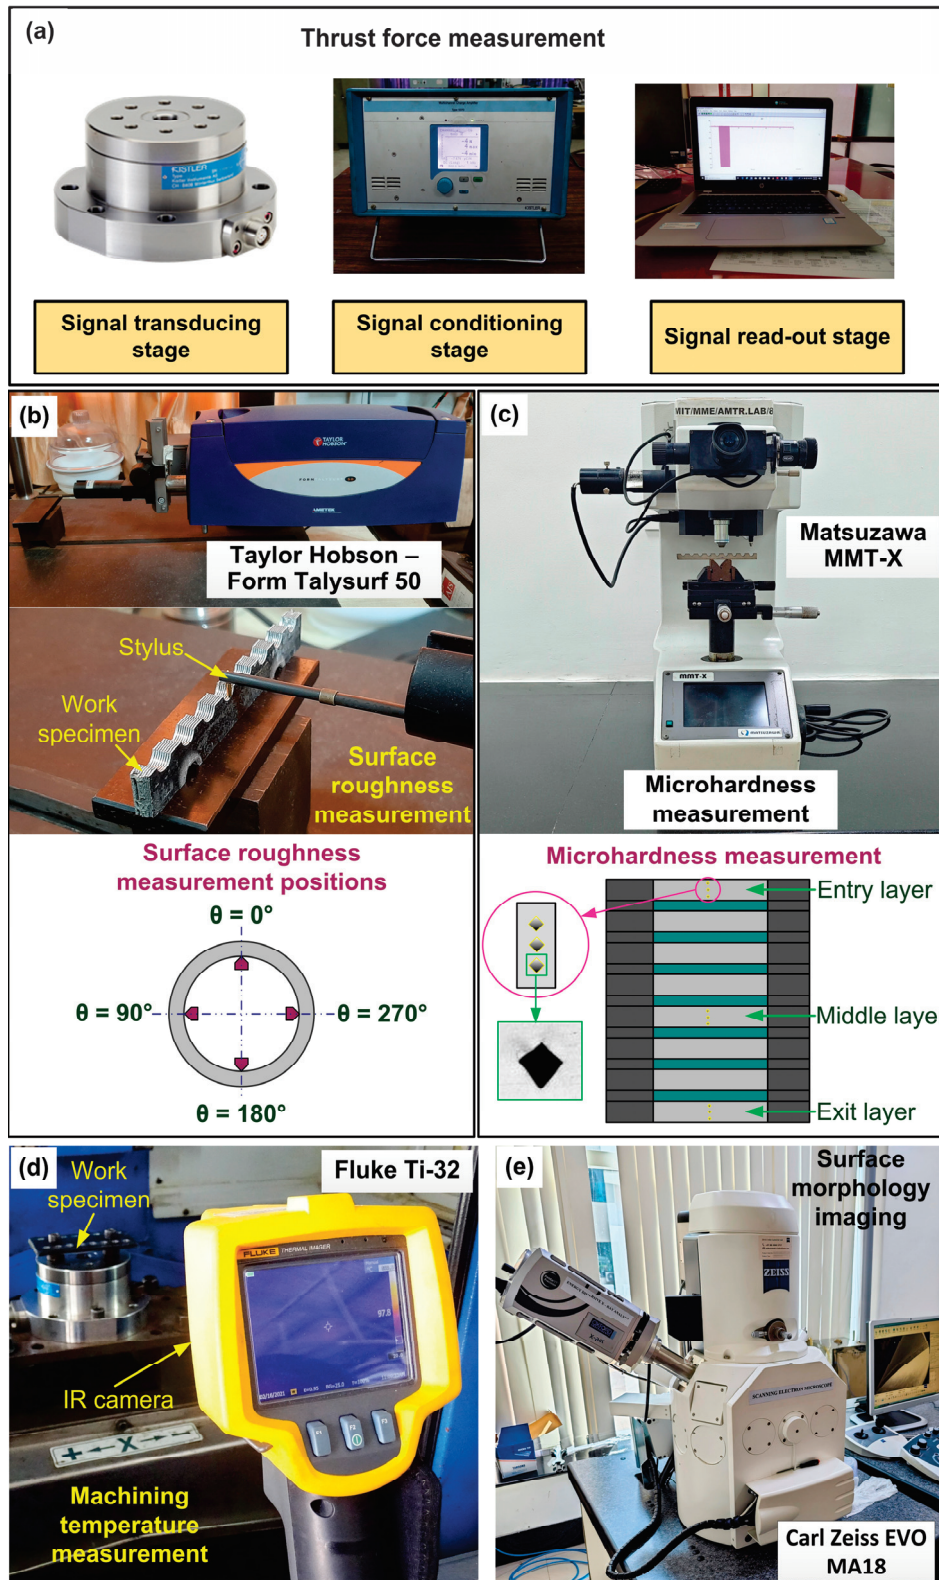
(a) Thrust force measurement; (b) surface roughness measurement; (c) microhardness measurement; (d) machining temperature measurement; (e) surface morphology imaging.
